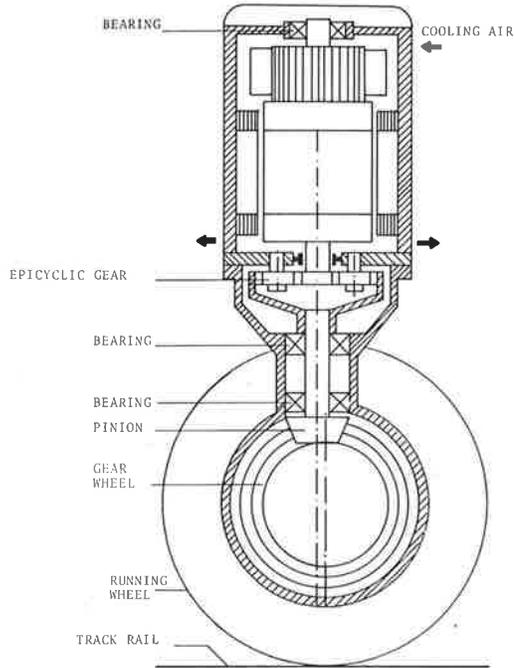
SCHEMATIC OF PROTOTYPE DC DRIVE UNIT AND SINGLE REDUCTION GEAR
